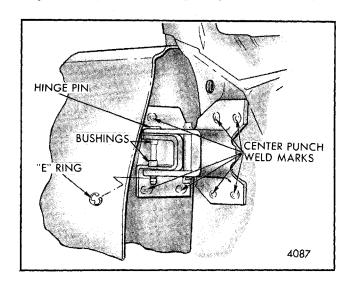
Front Door Hinge E Ring Removal - X Styles
